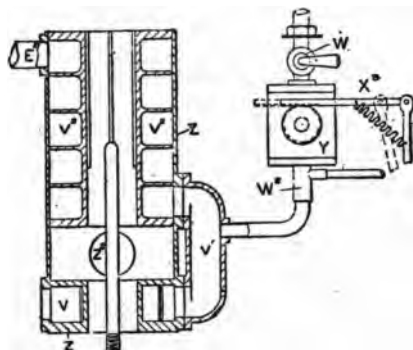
Roots' Vaporiser and Oil Feeder for Petroleum or Explosive Engines.
